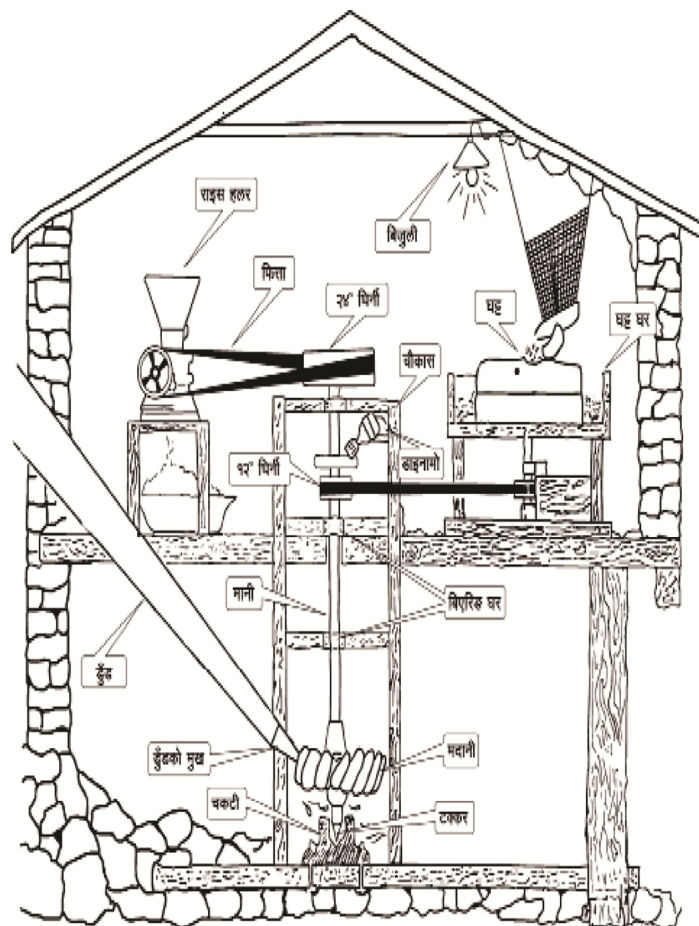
Long Shaft IWM indicating the milling components and electrical component
